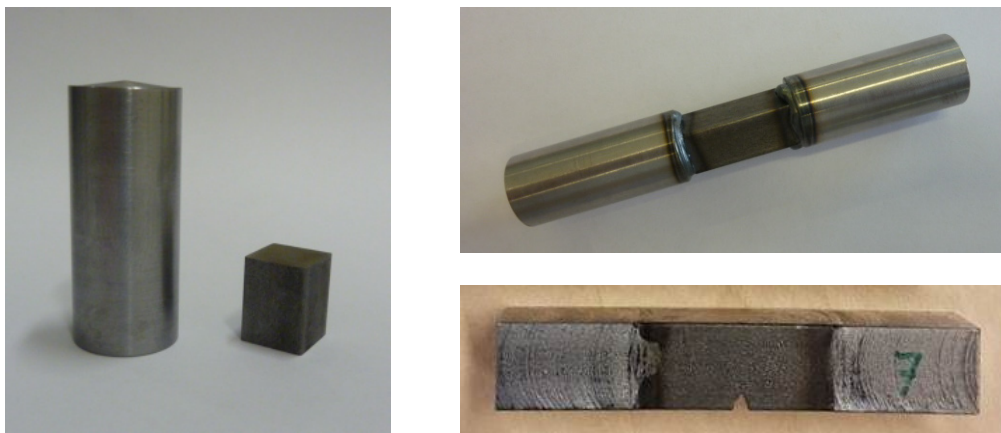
Stud, insert, welded studs and fabricated specimen
